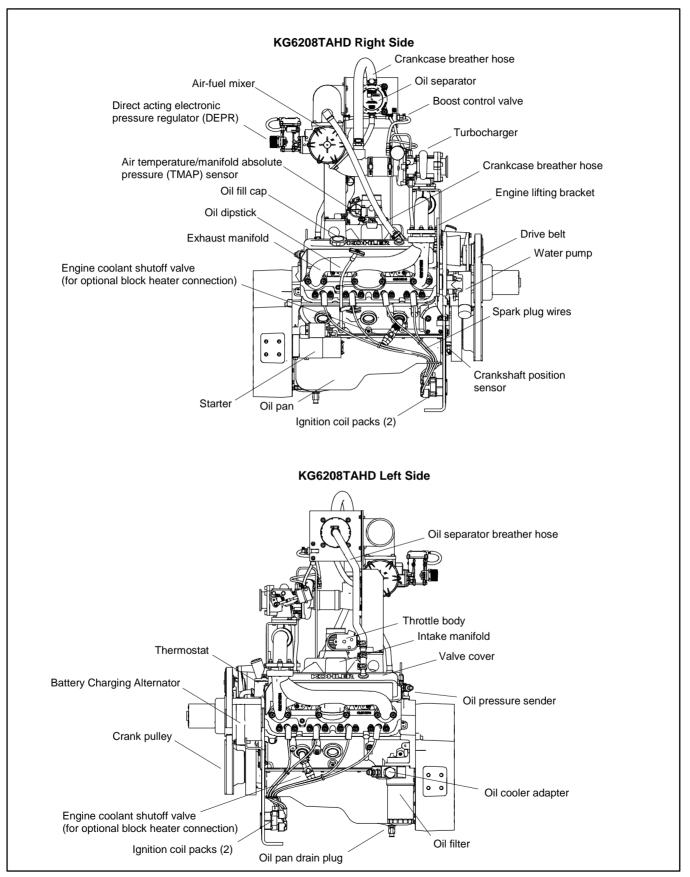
KG6208TAHD, Heavy Duty Turbocharged Engine Side Views
